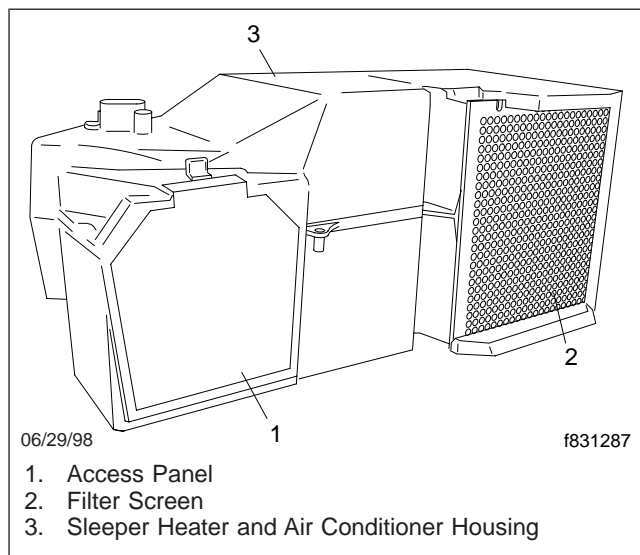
, Sleeper Heater and Air Conditioner Housing With Recirculation Filter
